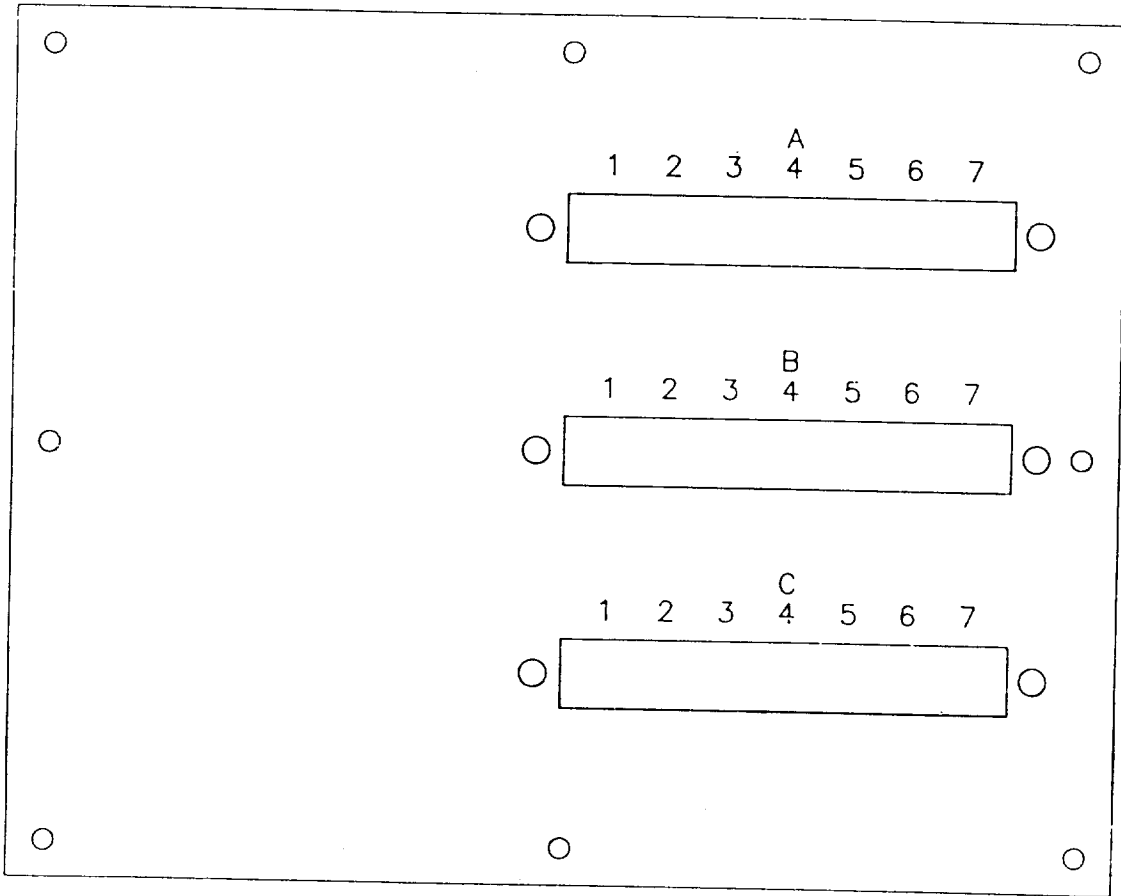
Layout of the terminal blocks on the rear side of the 1/2 rack case.
